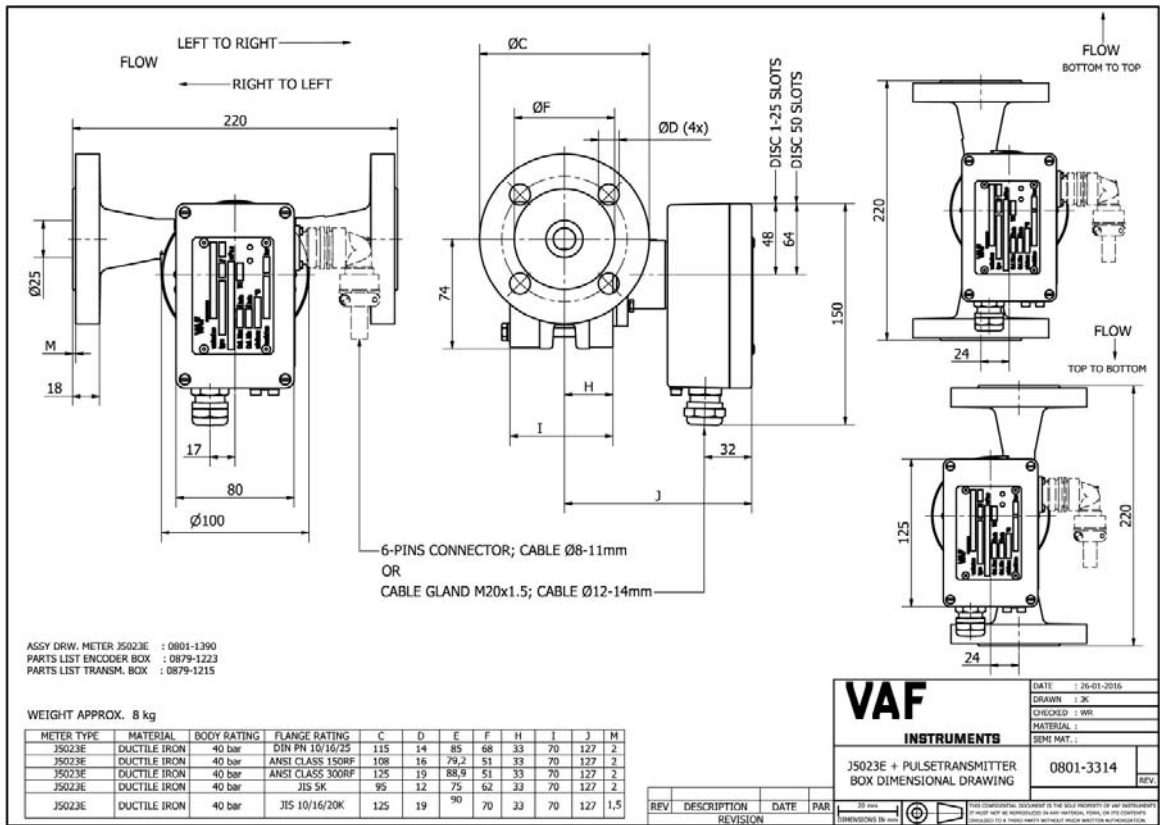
Drawing 0801-3314 – Dimensional drawing J5023E Pulse transmitter box
